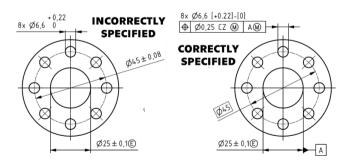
Example of improperly specified distance and its correct specification (marking) using geometric tolerancing (in accordance with ISO GPS) – pattern of holes.
